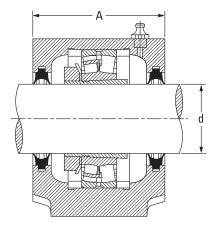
Spherical roller bearing mounted with an adapter sleeve.
